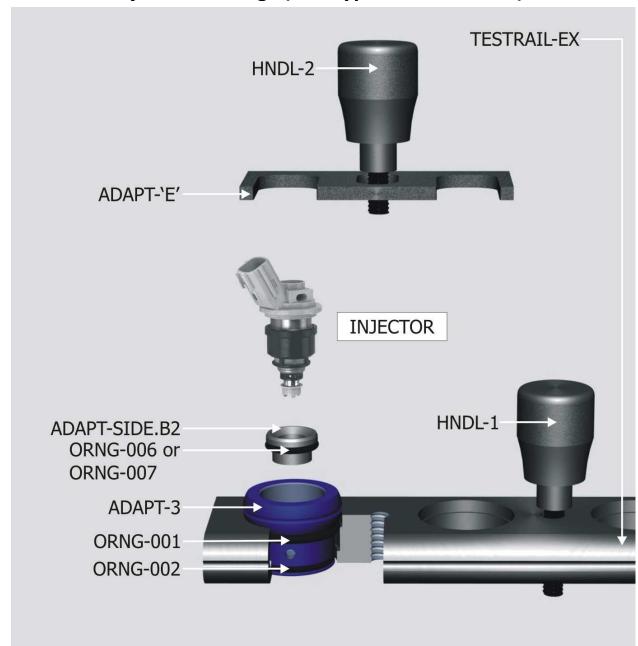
xiii, Side-Feed Type (B) Fitting Illustration (3)
